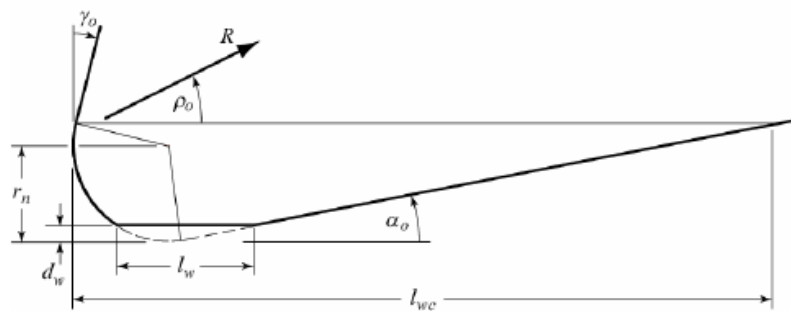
2 Geometry of an edge-radius tool with a flank wear land [177]
